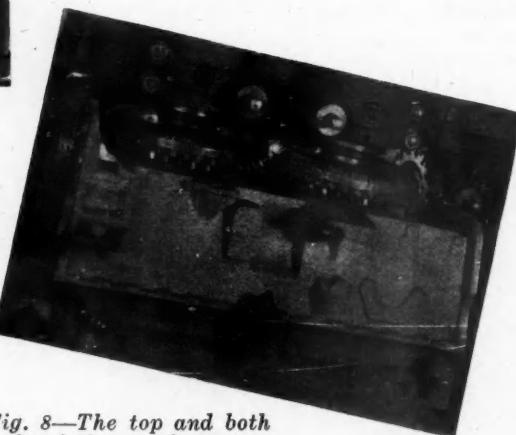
The top and both ends of the crankcase are milled on an Ingersoll planer type miller
